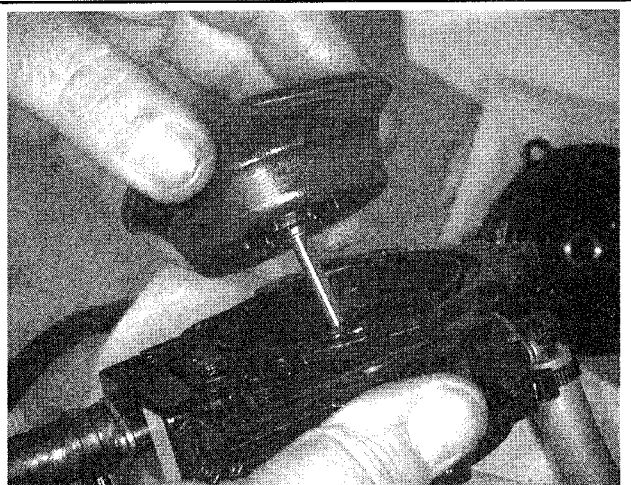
Once the air motor and fuel pistons/diaphragms are compressed and unthreaded, carefully pull the air motor diaphragm (with the piston stem in this case) from the intermediate housing...
